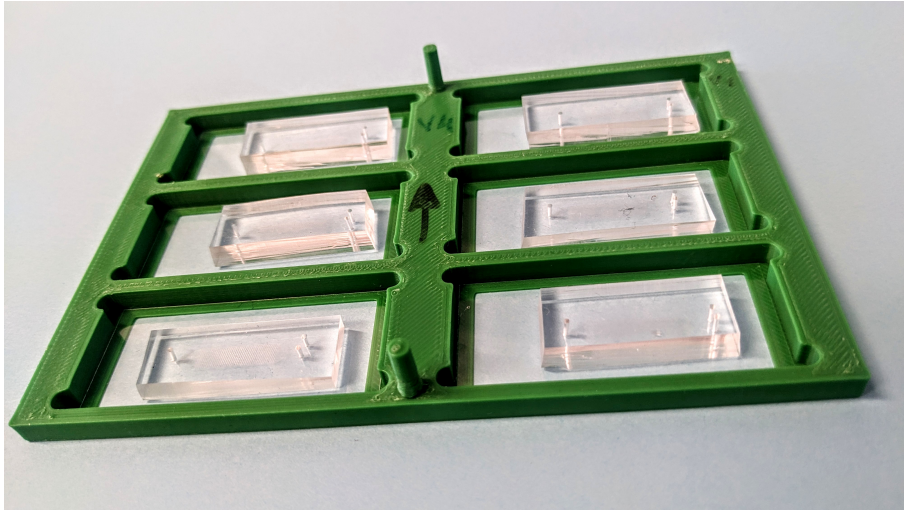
Chip holder 3D printed chip holder that can hold up to 6 chips
